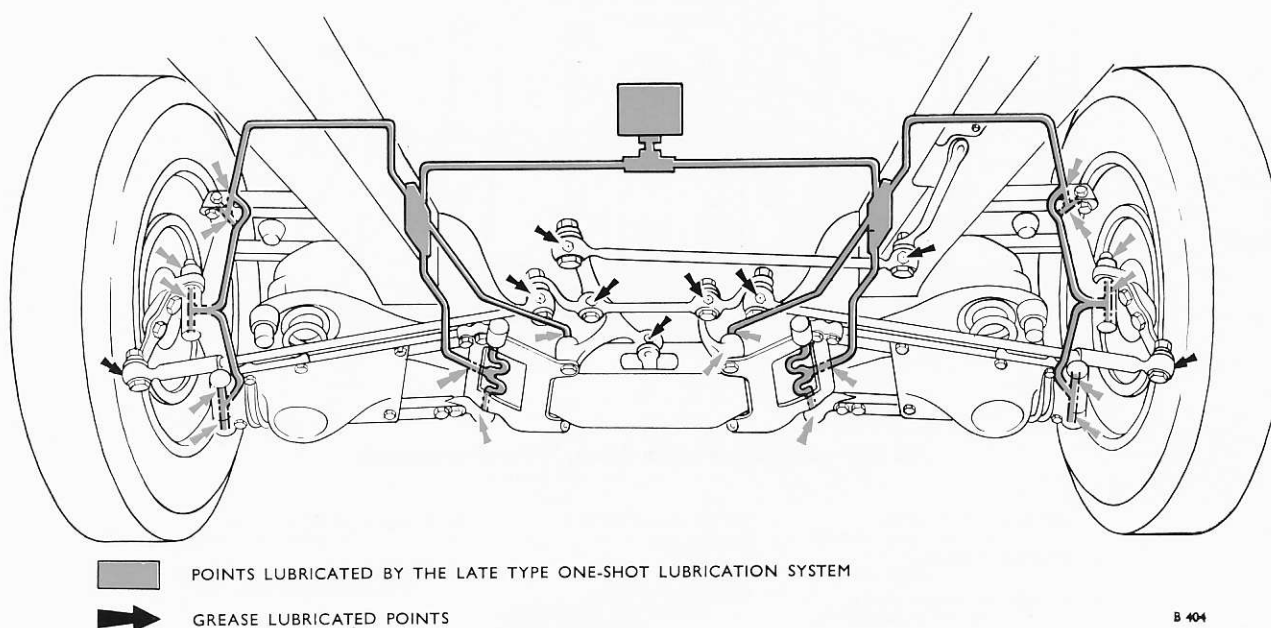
Late type one-shot oil lubrication system and grease lubricated steering joints
